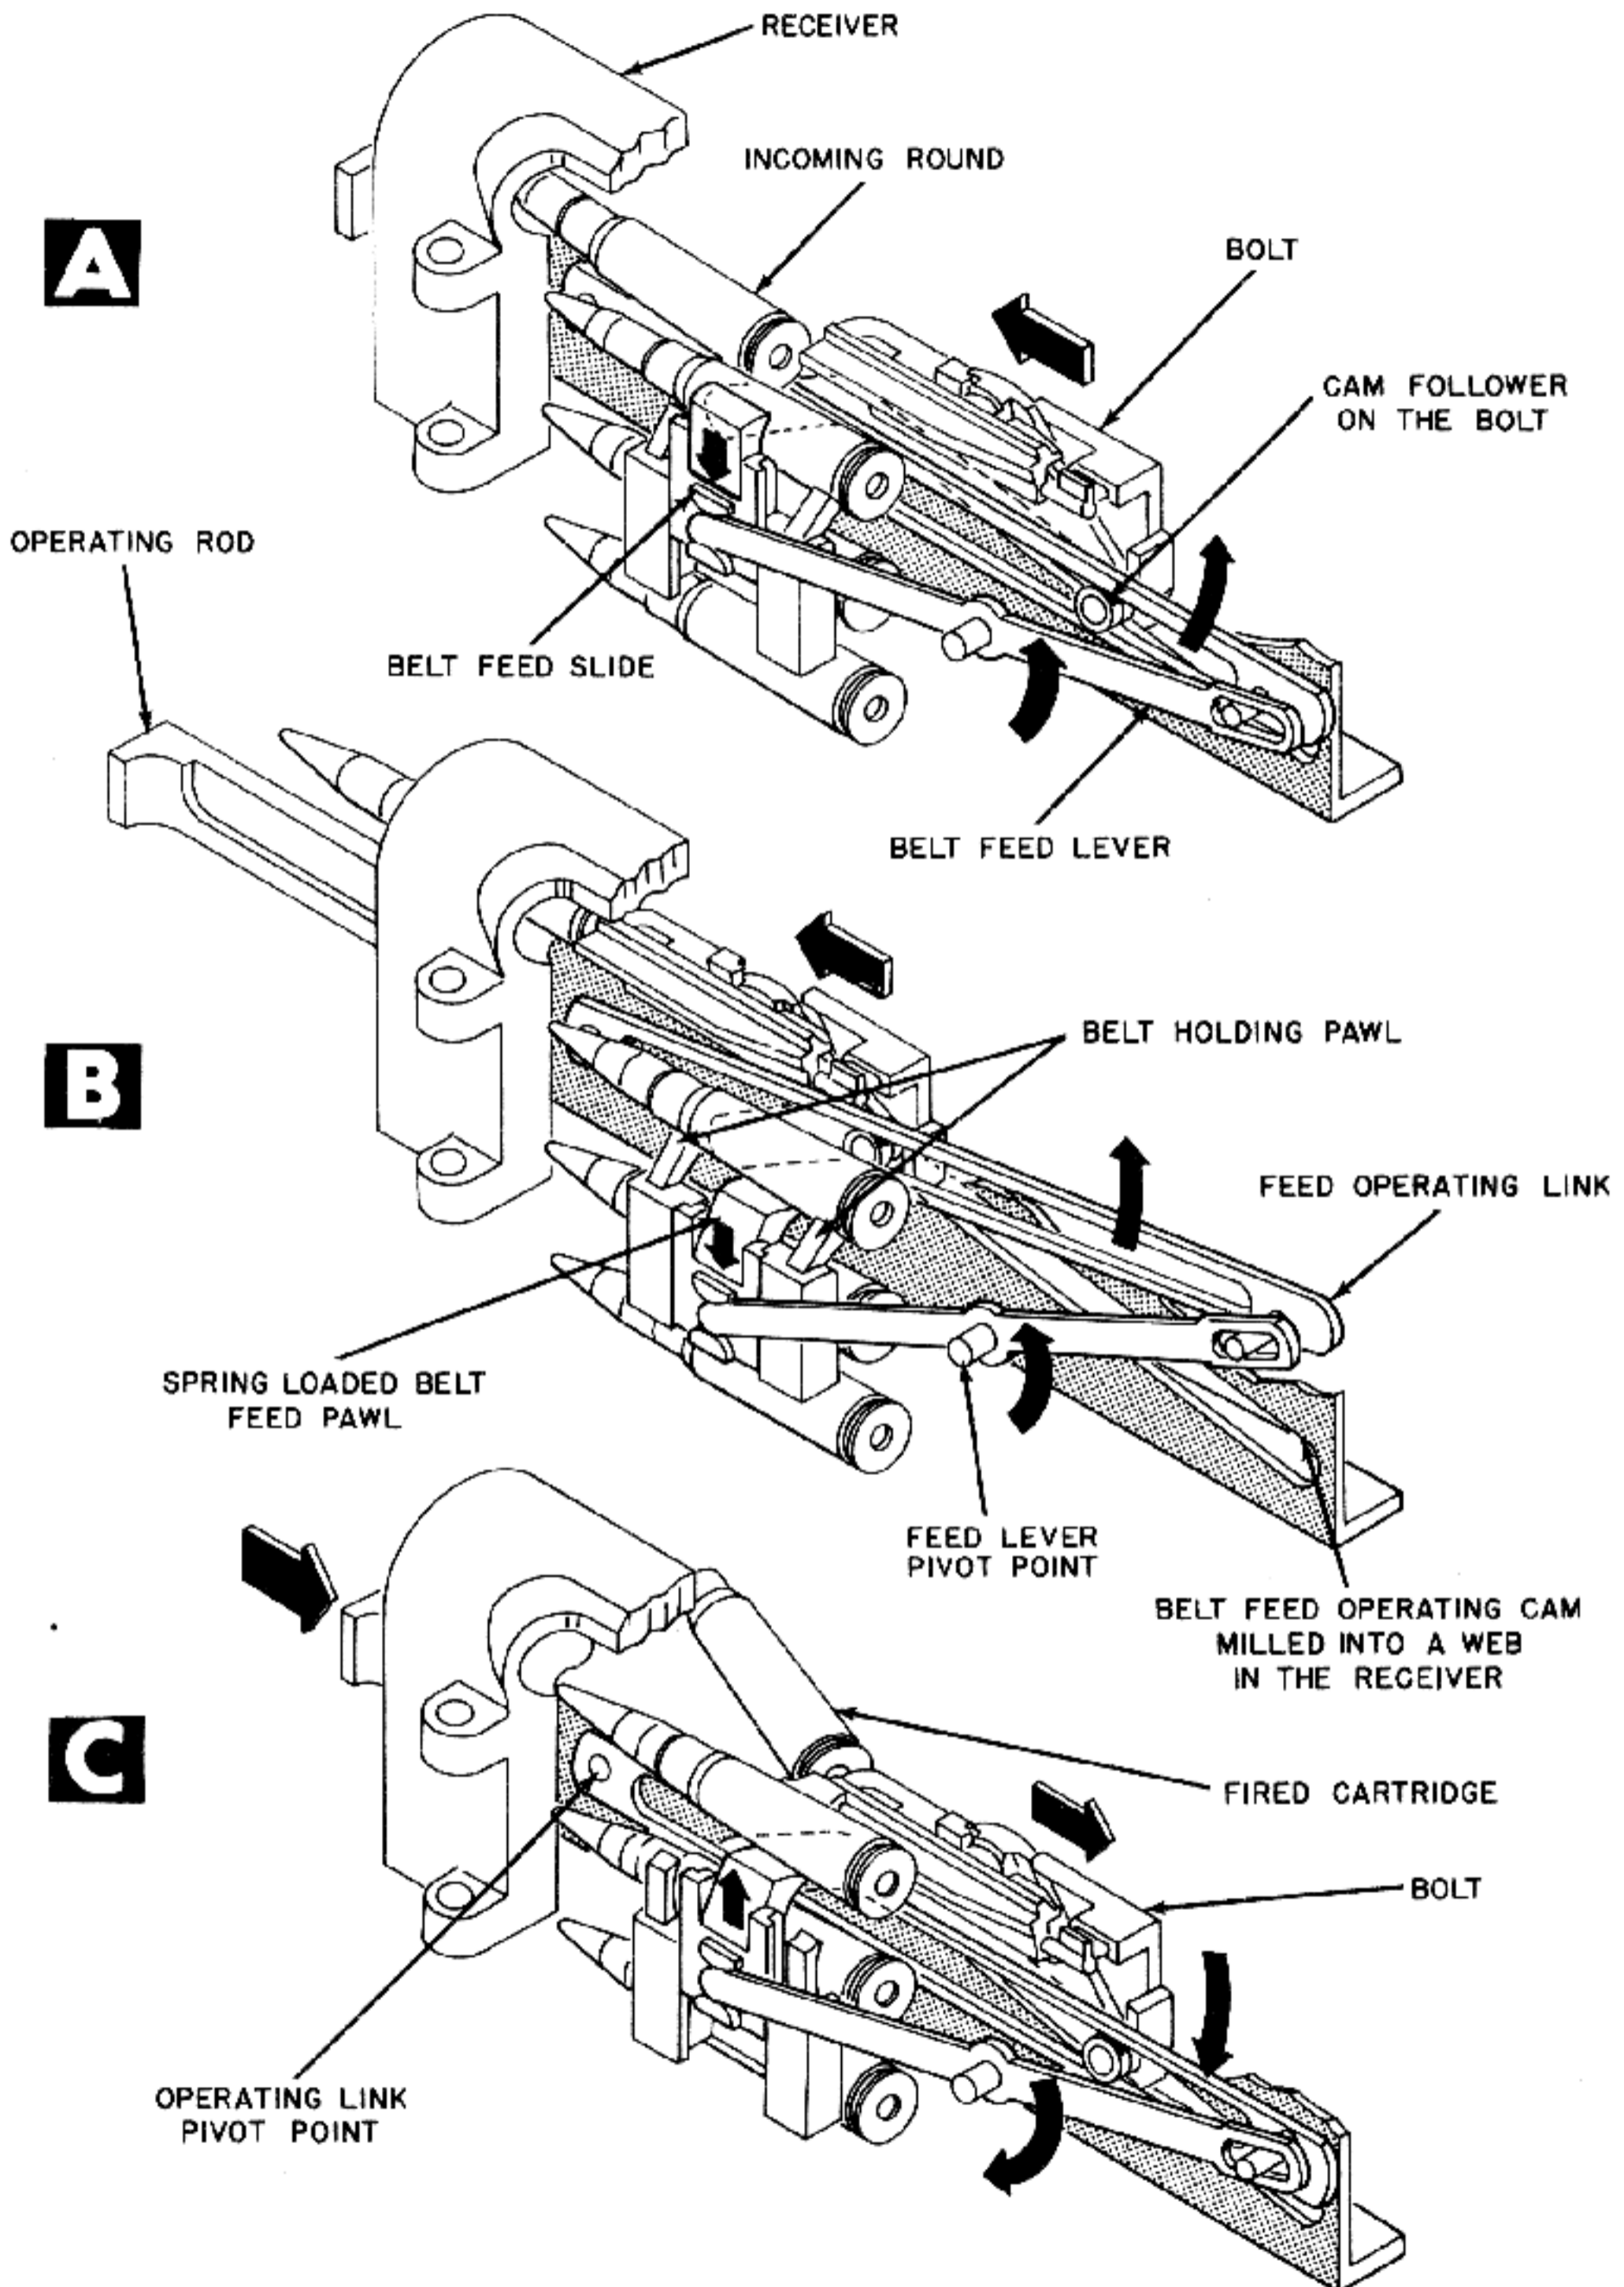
Cam Follower on Bolt Actuates Belt Feed Levers.
